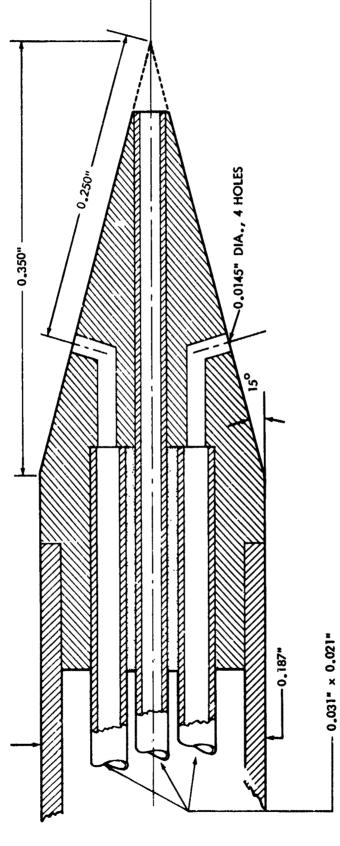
TYPICAL COLLE PROBE DIMENSIONS
